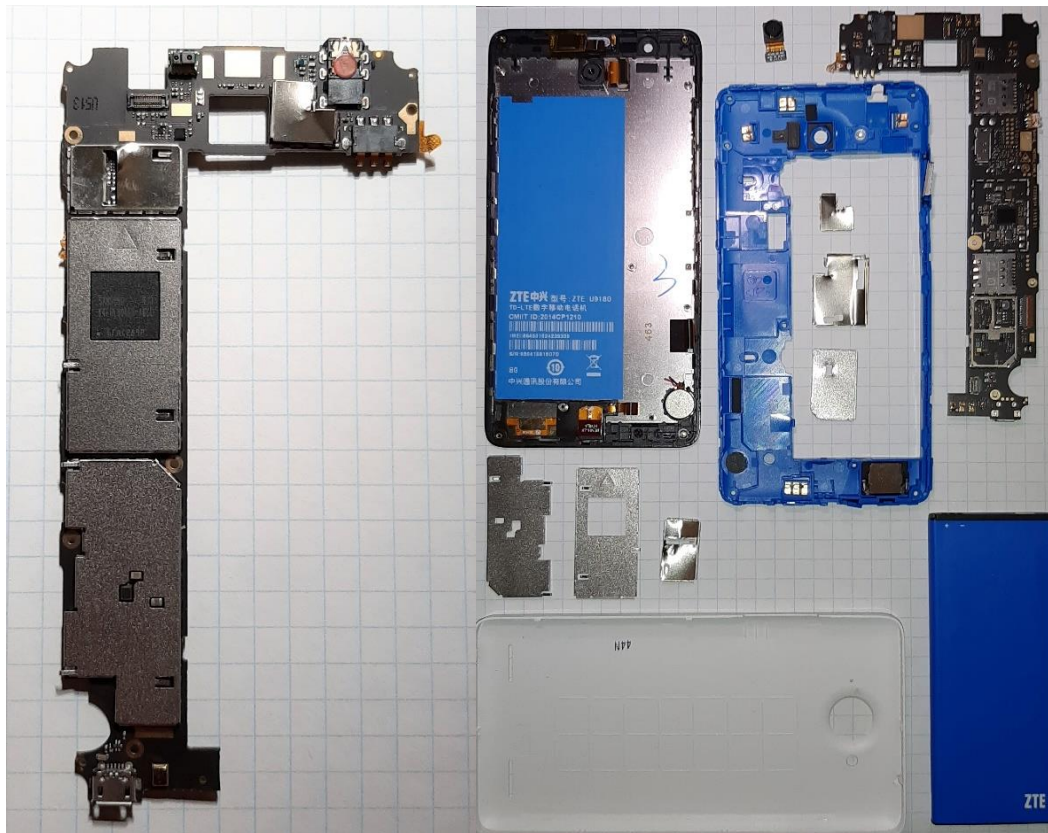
The mainboard is removed, and then there are metal covers that serve as Faraday cages that we then remove. Disassembly complete.
